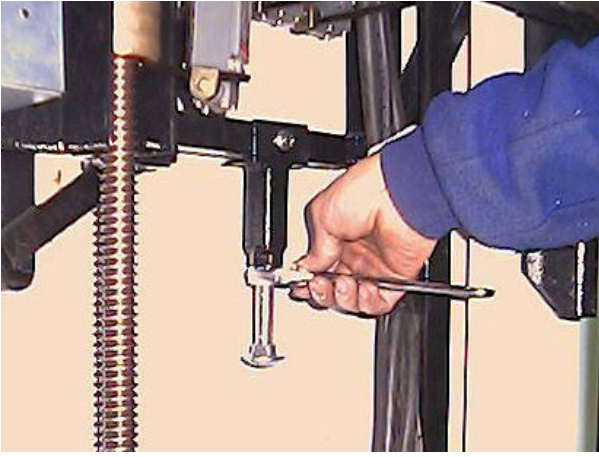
TIGHTEN LOWER MECHANICAL STOPS
